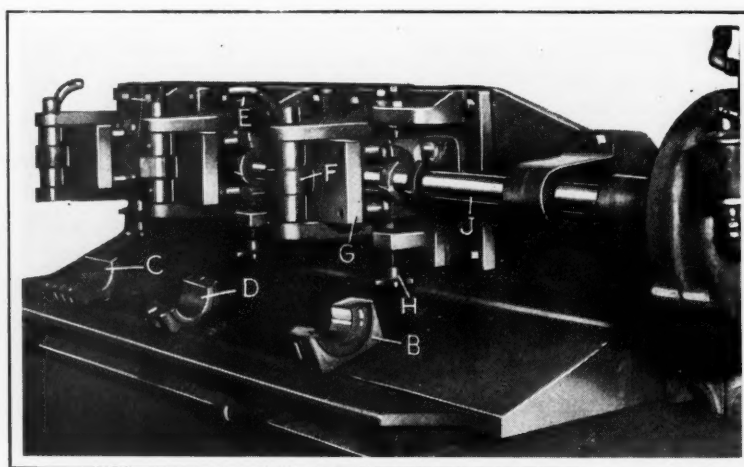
Simultaneously Rough-boring the Three Castings that Comprise a Complete Set of Crankshaft Bearing Caps
